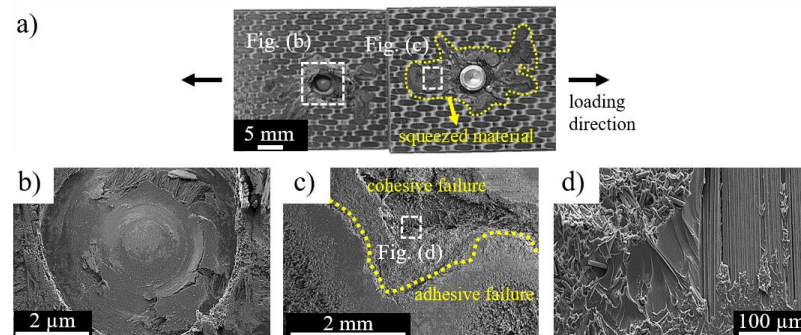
a) Overview of the fracture surface, showing the squeezed material consolidated at the interface between the composite parts; SEM micrographs of b) hole in the lower composite plate that remained after the joining process; c) squeezed material fracture surface, showing the adhesive and cohesive failure regions; and d) PEEK ductile fracture details along with exposed fiber bundles.
